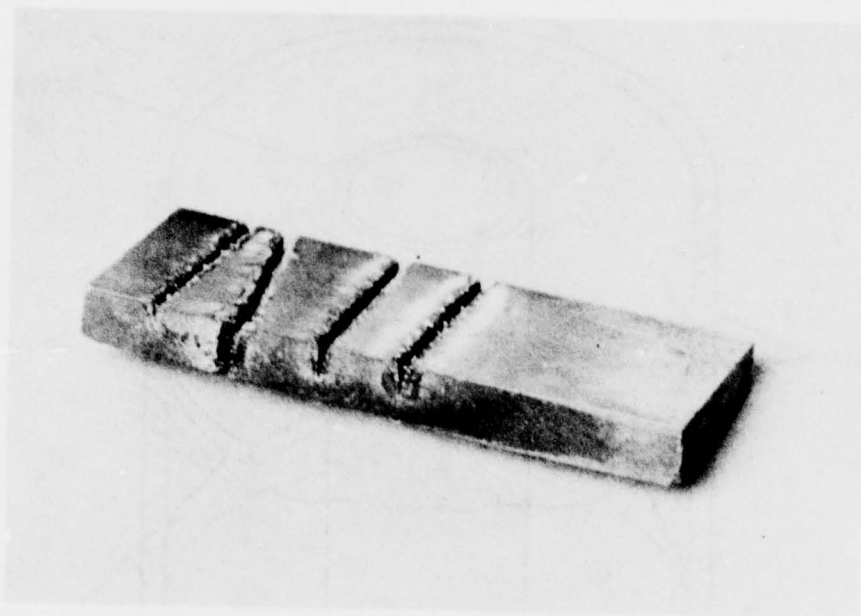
Penetration of FP/Magnesium by Electron-Beam Welding.
